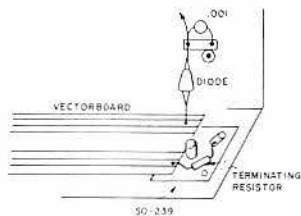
Center strip of vector board is soldered to center post of SO-239. Other components are mounted at each end of board as shown (only one end shown here).
